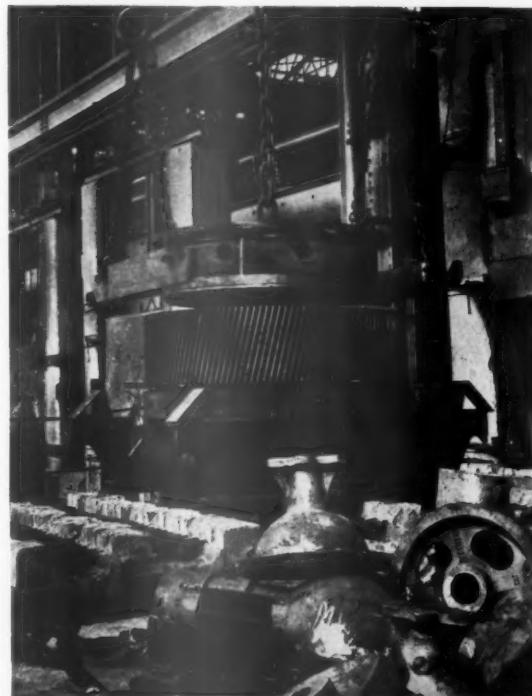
Wheel centre being lowered into carburised turbine wheel rim, 71-inch diameter, prior to quenching. The rim is supported on set-screw heads carried in a heat-resisting steel frame.
